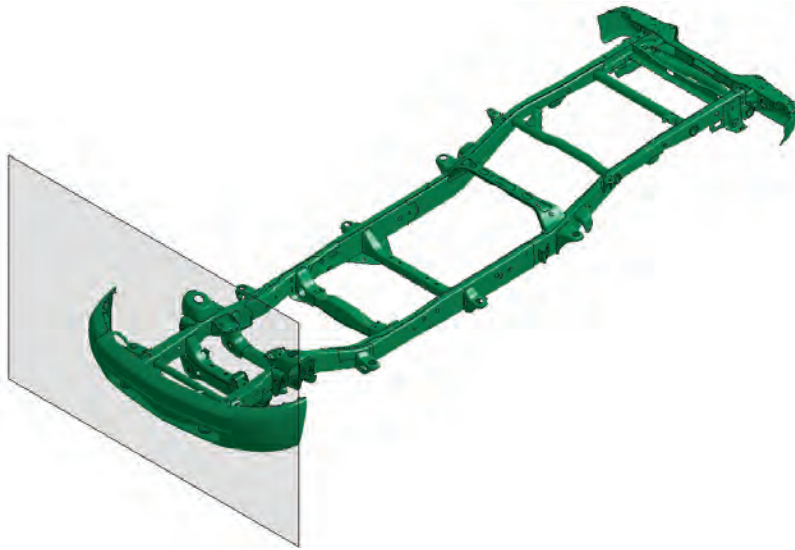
Rigid wall impact test of Silverado ladder frame.
